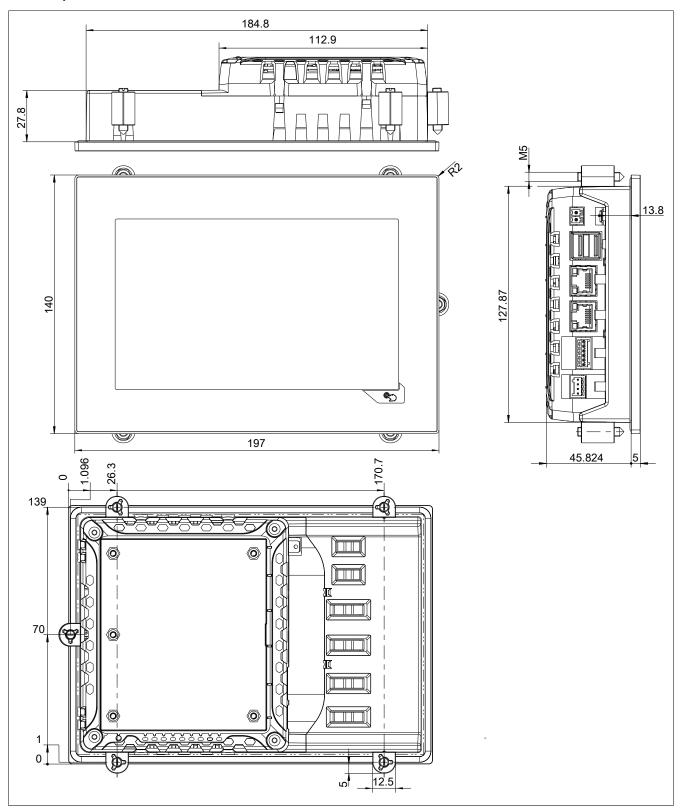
Dimensions - 4PPC70.070x-2xx - 4PPC70.0702
